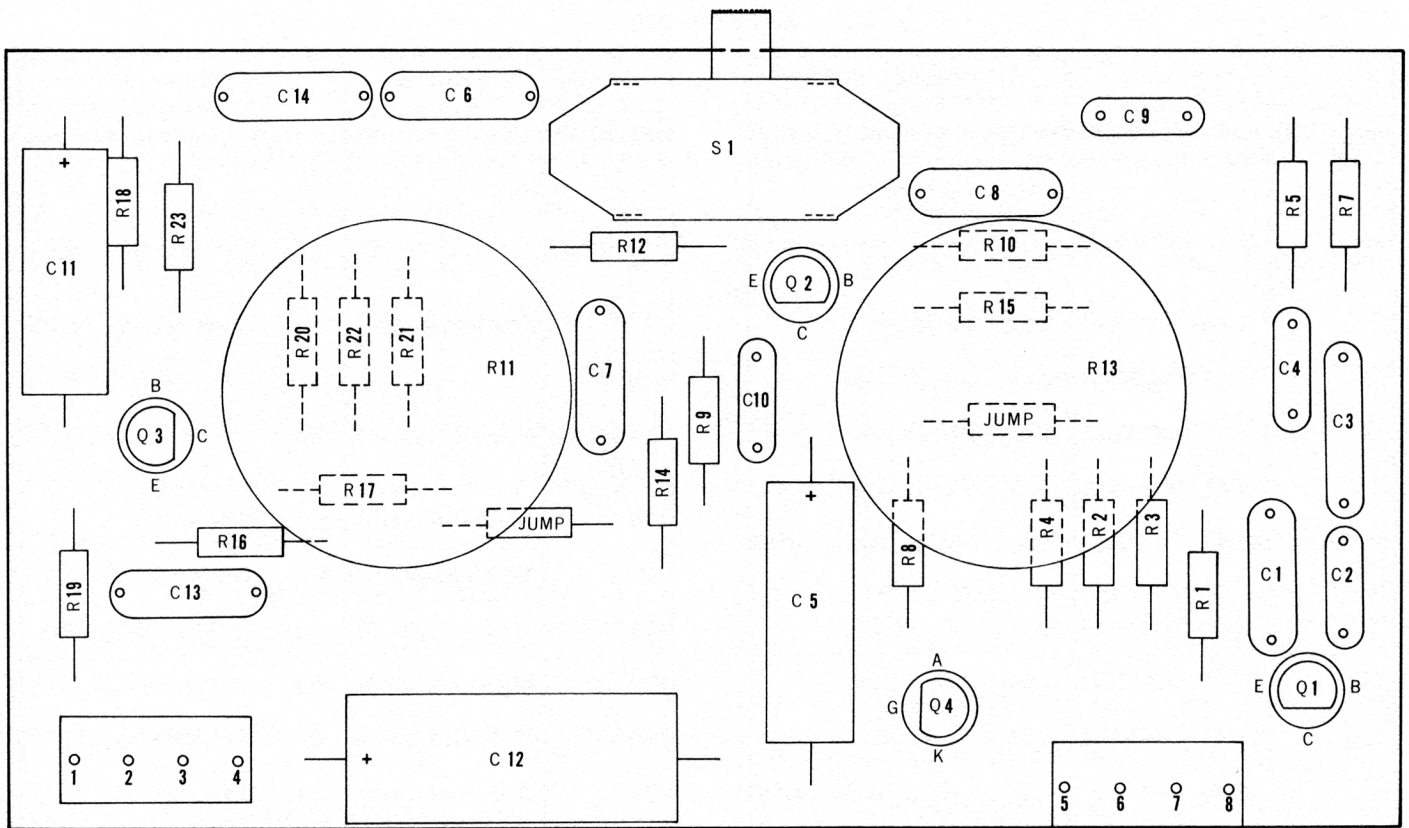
Electronic Part Locations (3D482-1), Tone Control and Tone Generator PCB Assembly
